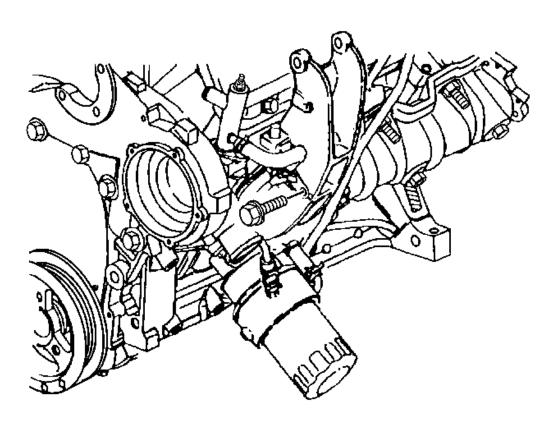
Removing Engine Mount Strut - Right Courtesy of GENERAL MOTORS CORP.
